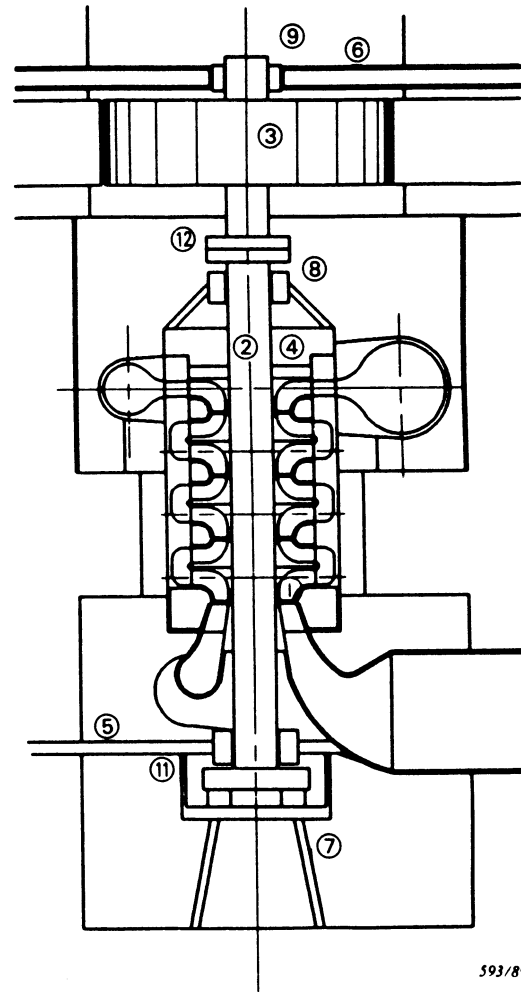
Example of a vertical machine (four-stage storage pump) with the thrust bearing at the lower end of the shaft and three guide bearings
